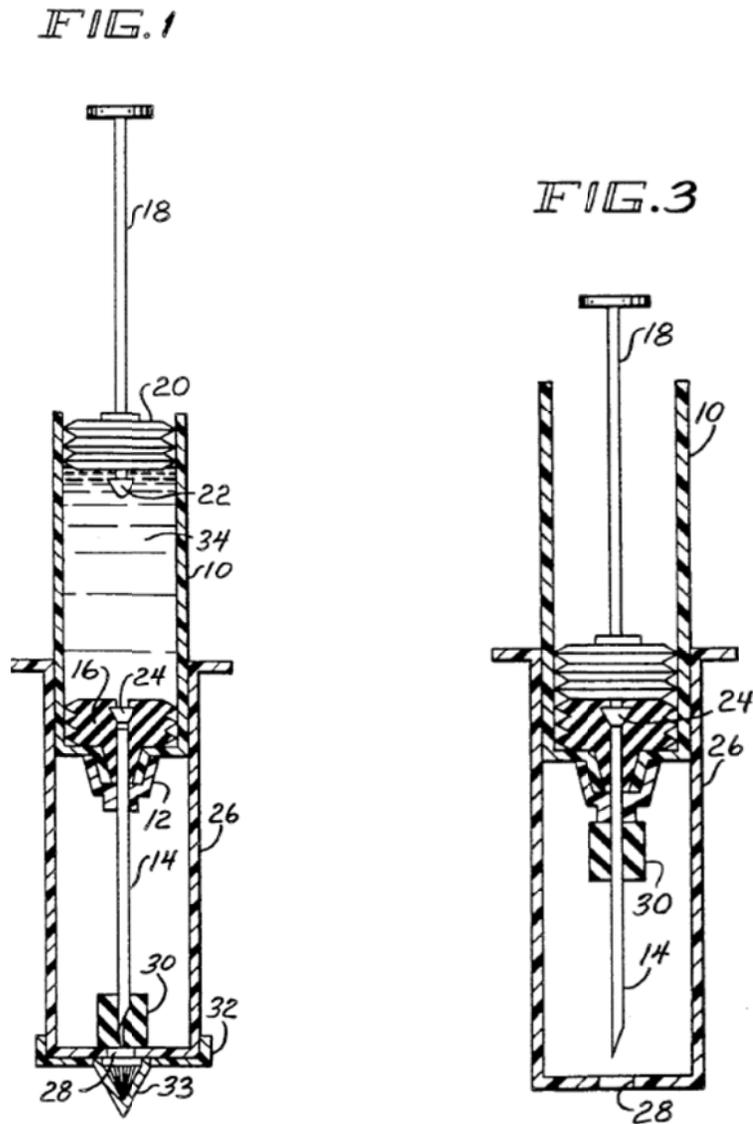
is “a side view in partial section of one embodiment of the present invention showing the syringe as stored prior to use.” (*Id.*, col. 1, ll. 64-66.) Figure 3 is “a view similar to FIG. 1 ... showing the syringe retracted into the syringe holder after use.” (*Id.*, col. 2, ll. 1-2.)
